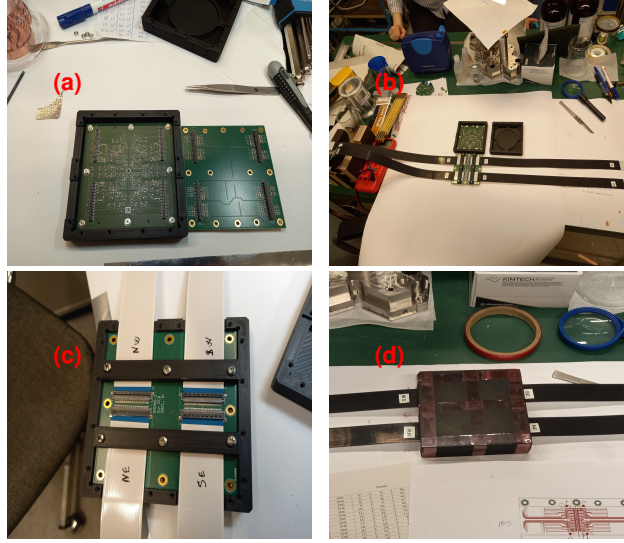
Different stages of development of various PCBs (a) SiPM matrix front panel already coupled to scintillator and enclosed in the black box from that side (b) Flat cables connected to FTSH PCB back panel, (c) SiPM matrix back panel connected to FTSH board front panel, (d) full assembly covered with the black box.
